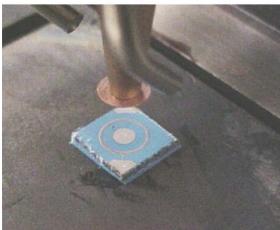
The flip chip bonding process allows for accurate alignment and maintaining a gap during soldering.
